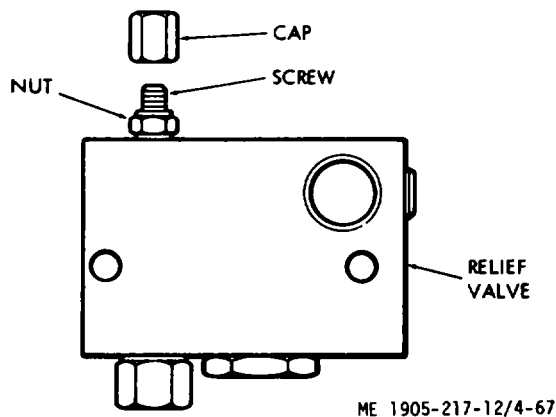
Relief valve adjustment, steering system, hull numbers 8500 thru 8519.
